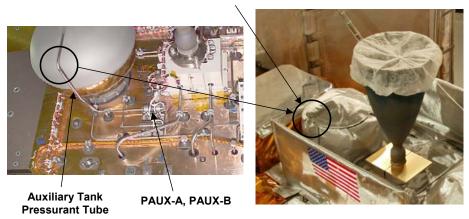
Auxiliary Tank Pressurant Tube Thermal Blanket
